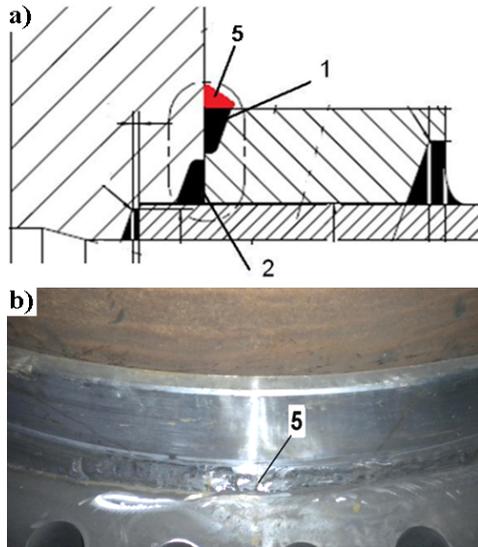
Weld seam no.5 (b), which was not mentioned in assembly drawing as can be seen in Fig. 7
